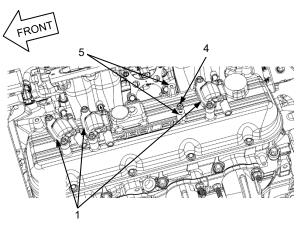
Driver side Ignition Coils #1, #3 and #7 (1). NOTE: *Ignition Coil #5 removed to show Valve Cover Coil Mount Bosses (5) and Coil Mounting Bolt (4).
